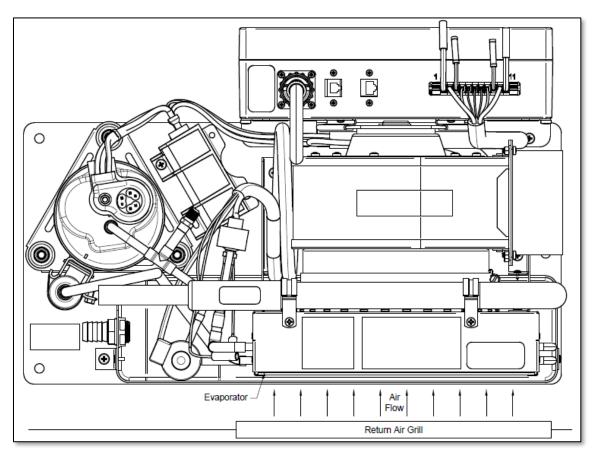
MOUNTING THE UNIT - EVAPORATOR POSITION
